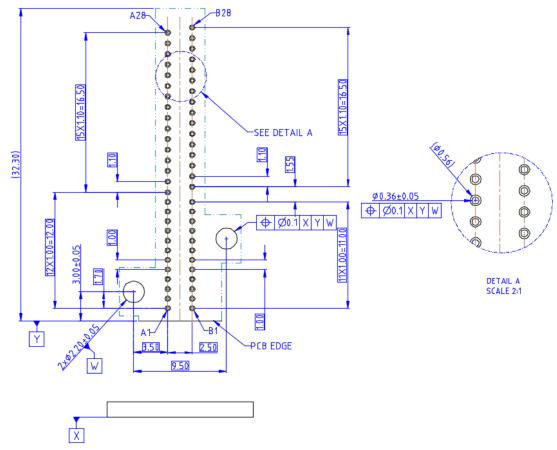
1C PRESS FIT ORTHOGONAL CONNECTOR FOOTPRINT (MM)
